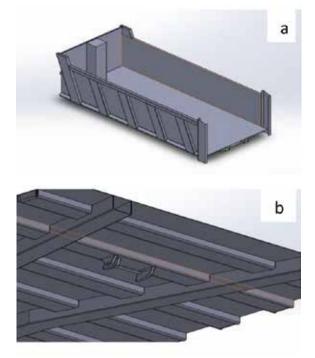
(a) CAD Model - Truck Body Isometric View (Gate Side),
